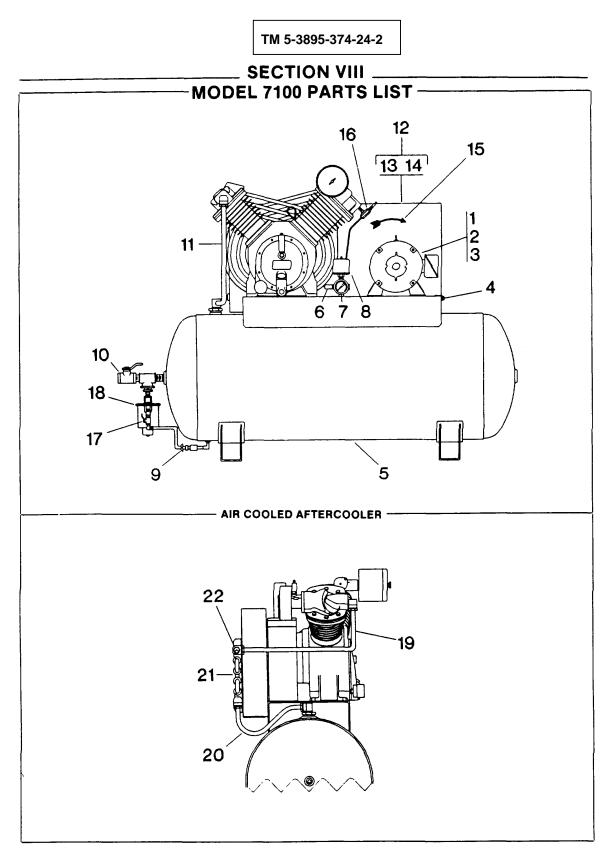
COMPRESSOR DRIVE, AIR RECEIVER AND ACCESSORIES.
